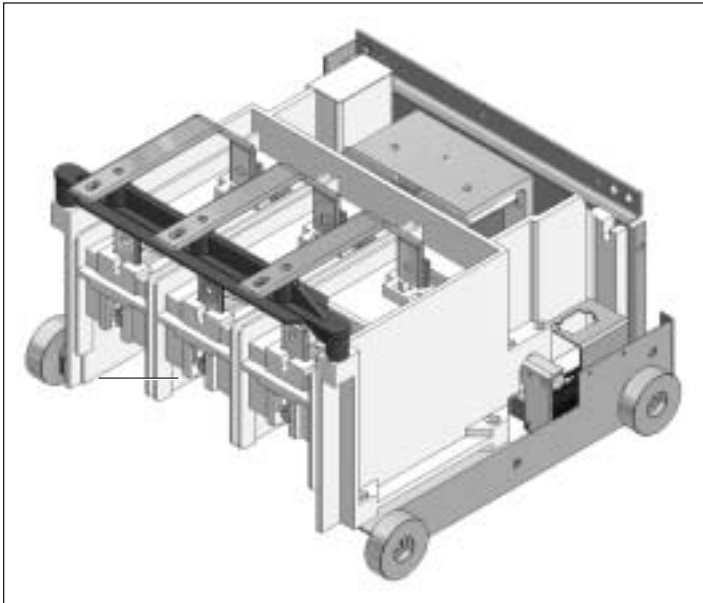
BOLT-IN CONTACTOR REAR/SIDE VIEW
